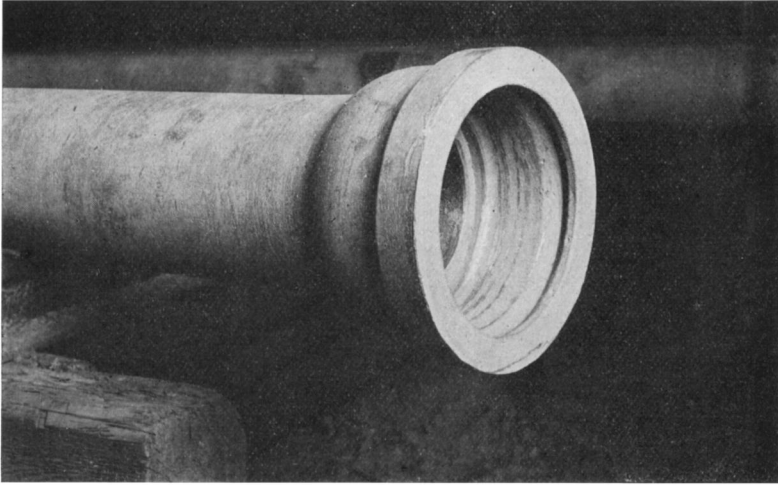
BELL END OF MACHINE MADE PIPE, SHOWING SHELF FOR CENTERING SPIGOT
